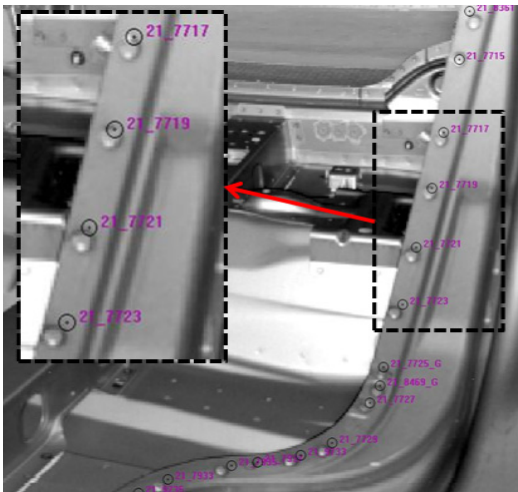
The actual spot weld position compared to nominal spot weld position (indicated with black circles)
